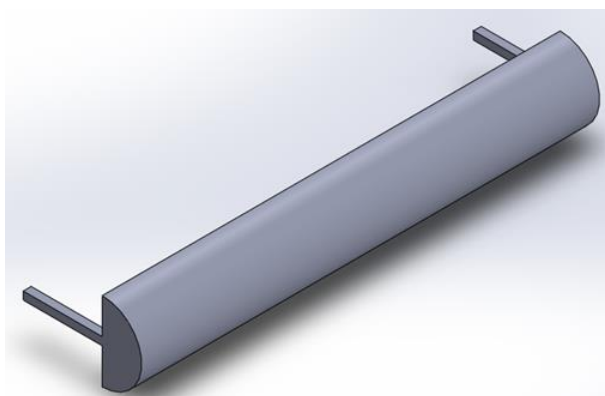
Solid Works drawing of a circular section flow control rod (D=10mm)
